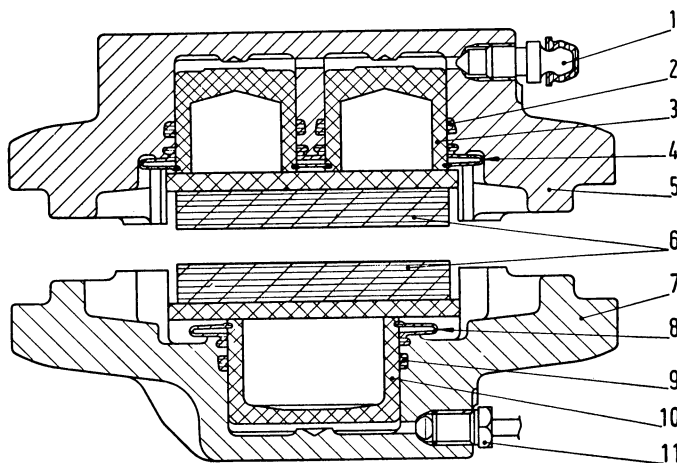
Side and section view of the right caliper for 1500 Cabriolet front wheel disc brake.
